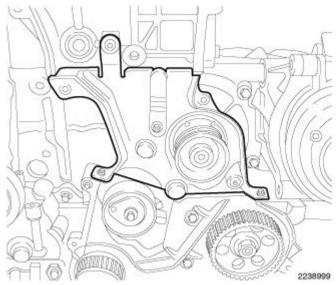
Inner Front Cover Courtesy of CHRYSLER LLC
